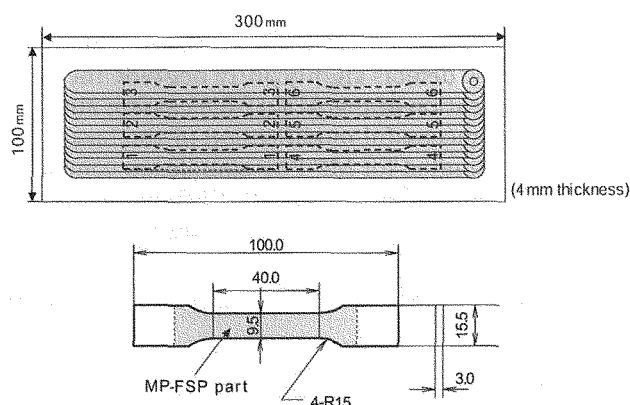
Working position and dimension of the tensile test specimen of MP-FSP.
